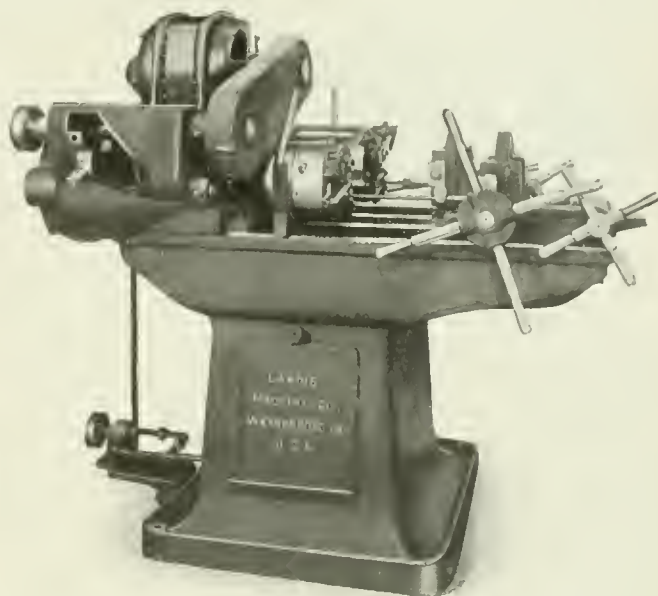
Landis 1-inch Motor-driven Bolt-threading Machine
